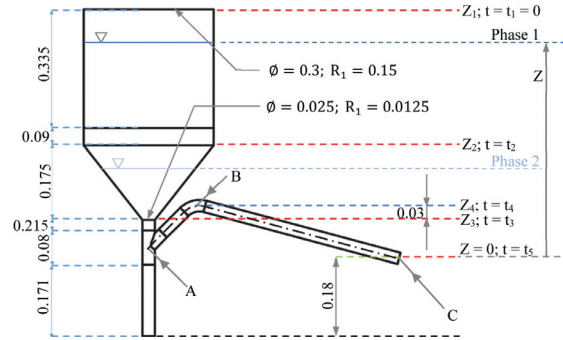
Sesame cleaning machine, where not drawn to scale and dimensions are in meter
